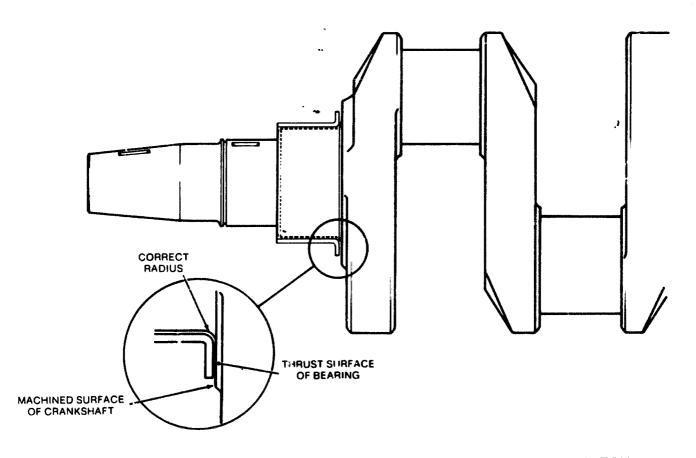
FRONT MA!N BEARING AND CRANKSHAFT RADIUS MATCH ALLOWING PROPER ENDPLAY.
